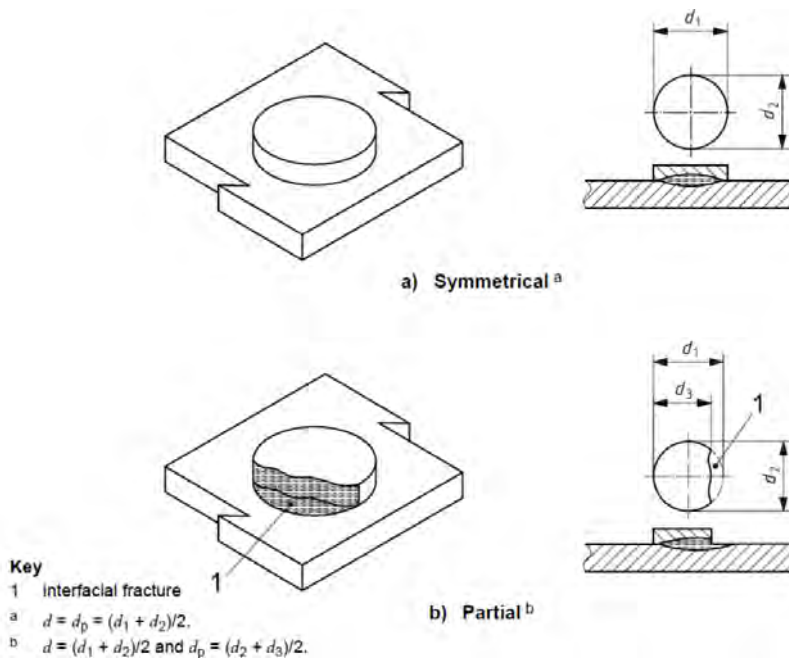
Schematic drawing of the symmetric plug and partial plug diameter measurement [23].
